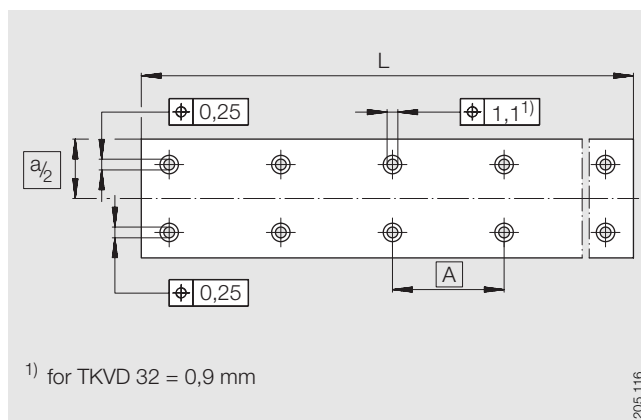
· Tolerance for guideways TKVD, hole pattern to DIN ISO 1101
